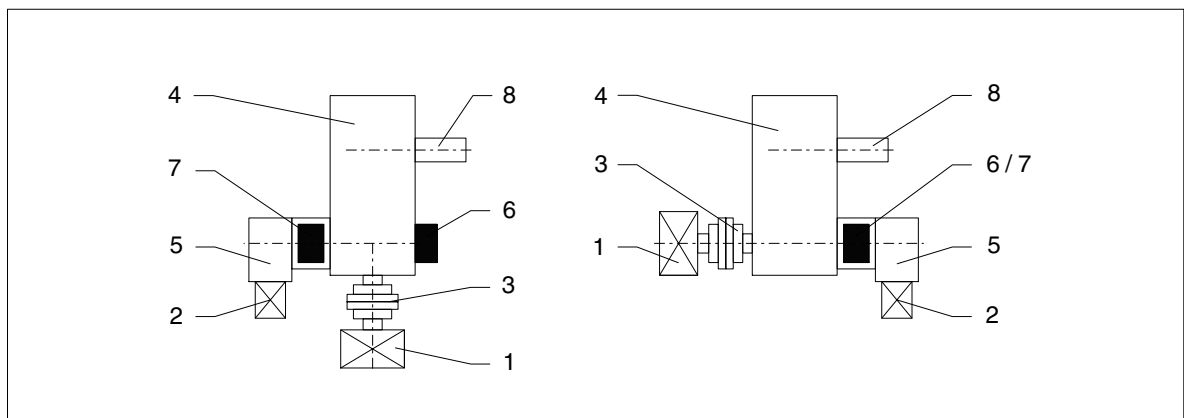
Basic design of the gear unit with main and auxiliary drives
